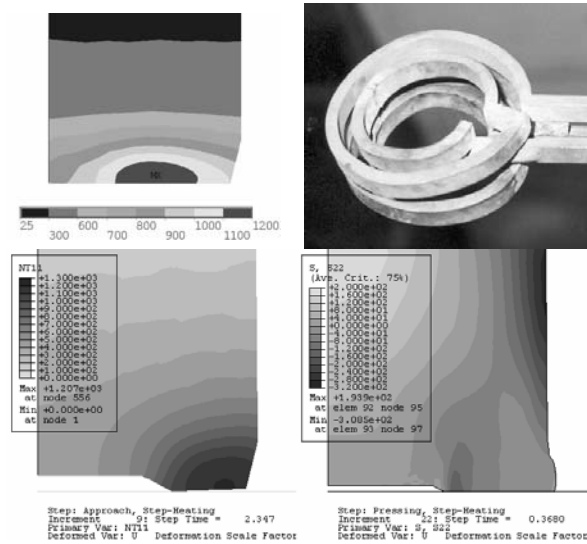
Coil designs and temperature distributions for through thickness welding and example of rod annular forge welding
